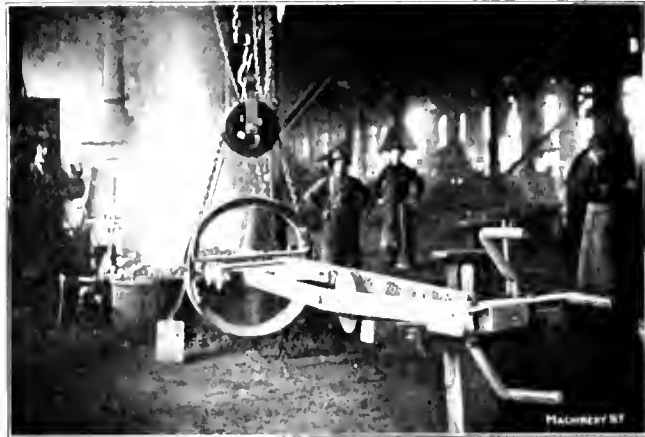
The Apparatus used to handle Locomotive Frames in the Blacksmith Shop
